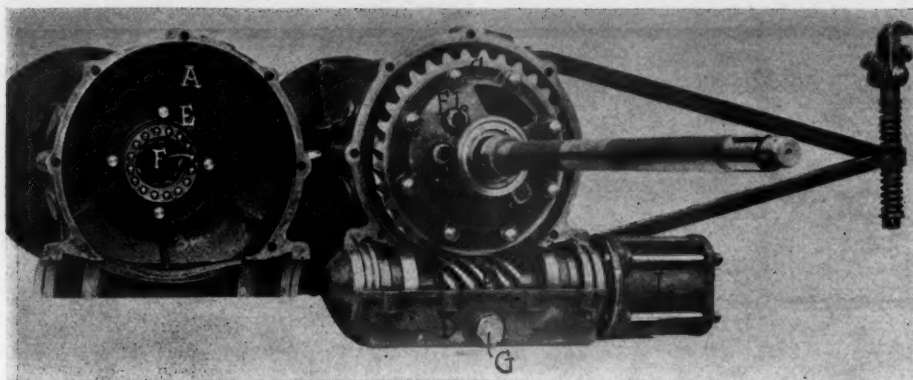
SHOWING WORM GEARS OF NAPIER REAR AXLE
